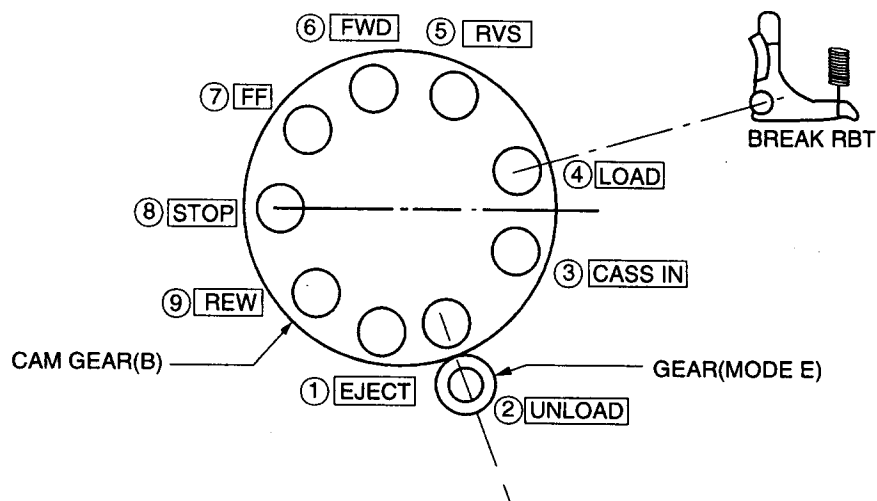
Positions of Cam Gear (B) Ribs at Each Position
